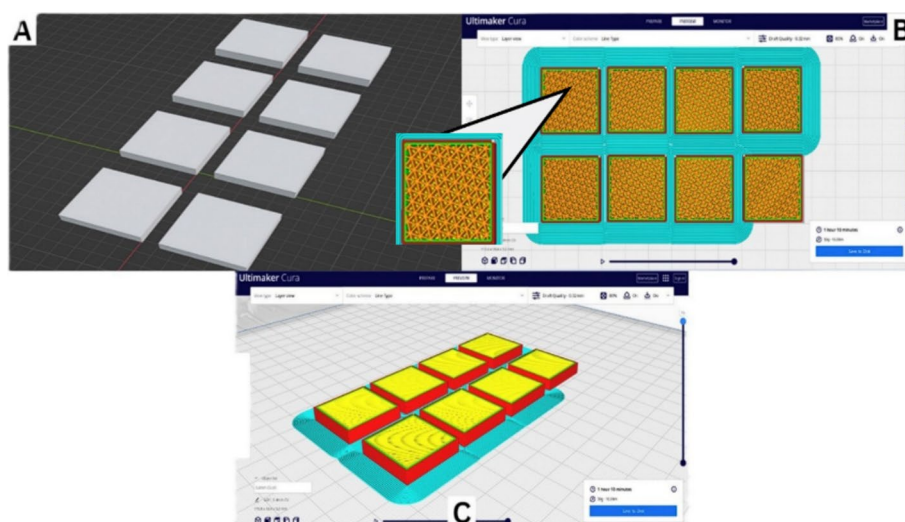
CAD design and slicing configuration for 3D printing eight uniform samples. (A) CAD model: rectangular sample arrangement on build plate. (B) Ultimaker Cura slicing triangular infill pattern and brim settings (zoomed-in). (C) Sliced layer preview. The reduced brim on the bottom right sample was due to material-saving measures that did not affect print quality
